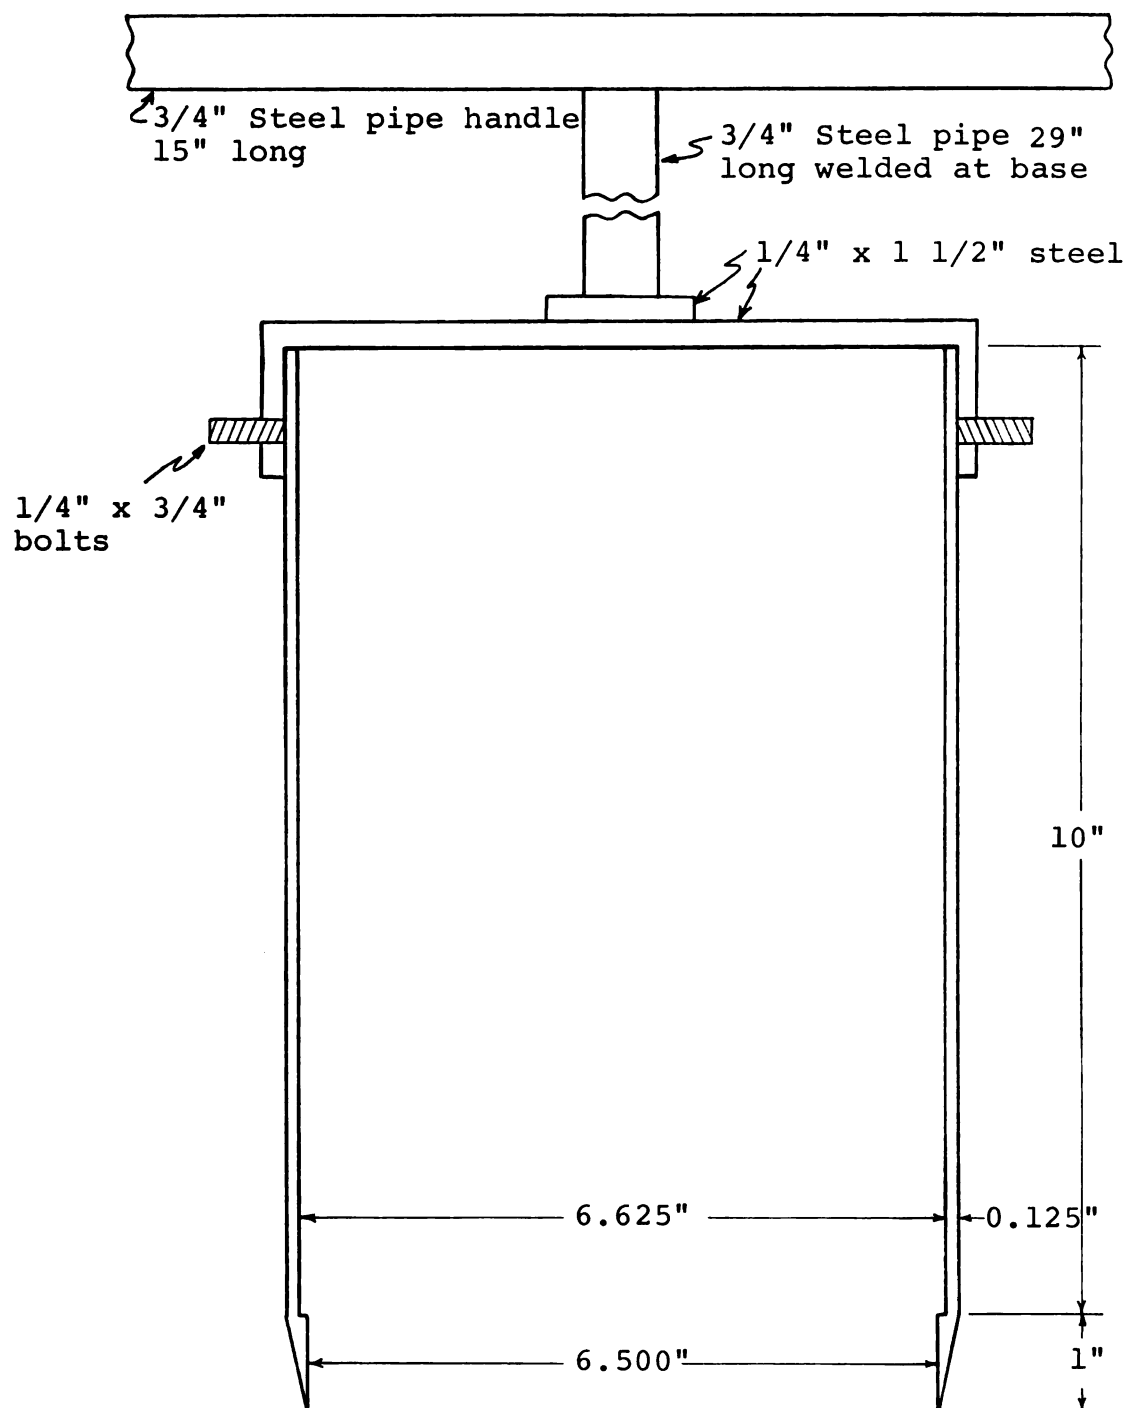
Cross-section of the humus-soil sampler and handle assembly.
